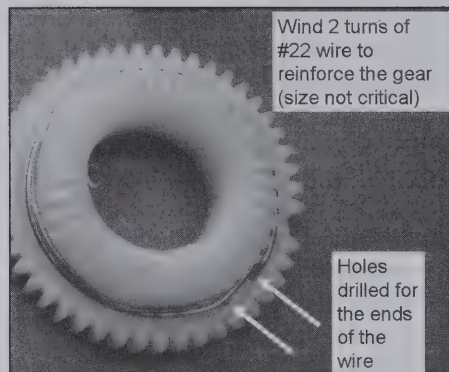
Wiring the gear. (Modified Erik Paret photo.)
